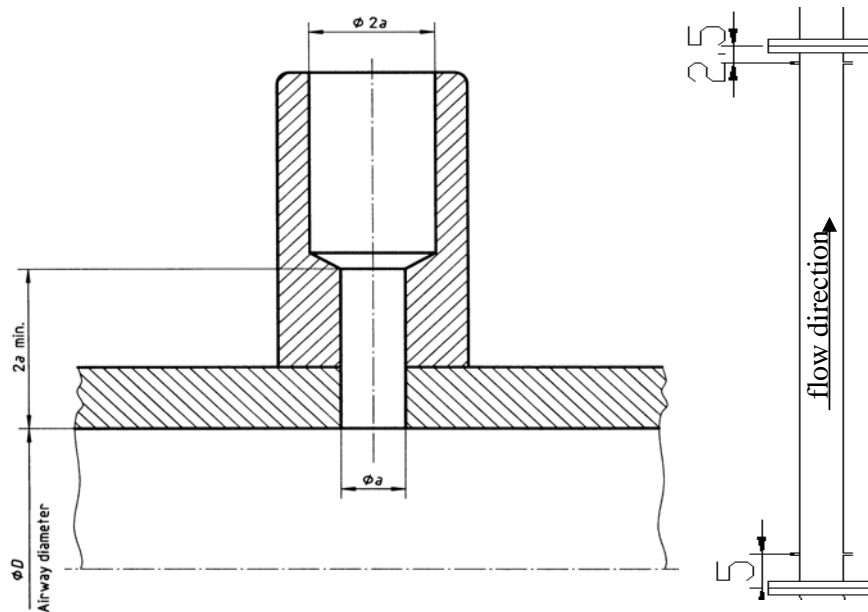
Construction of wall tapplings in cm (from BS 848)
